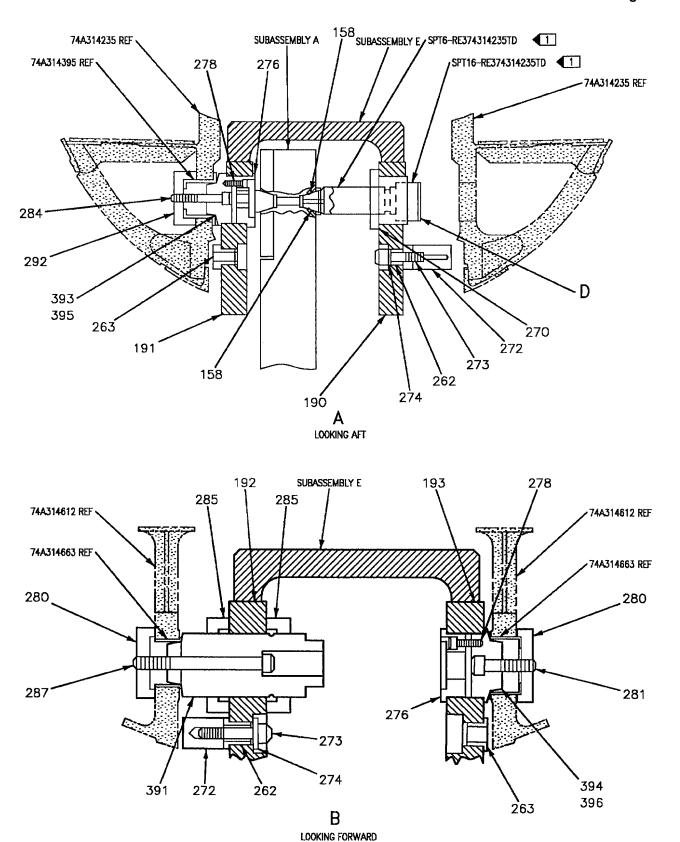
Trunnion Bearing Third Oversize Sleeve Installation (Sheet 2)
